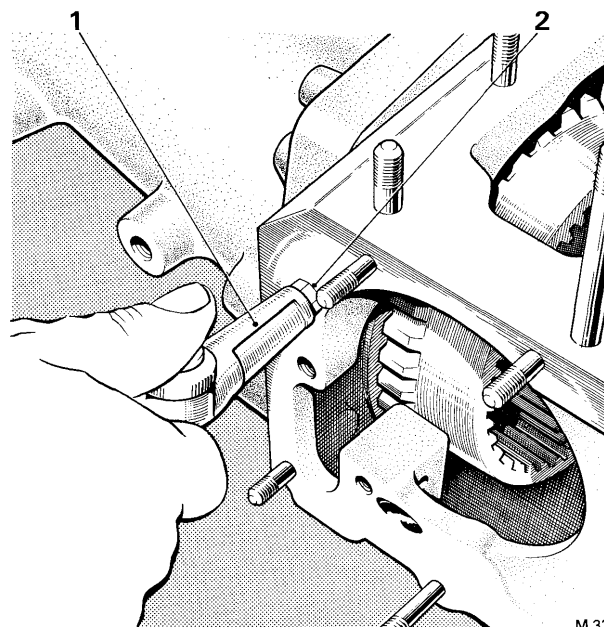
CENTRALISING THE REVERSE CLUTCH CONE
